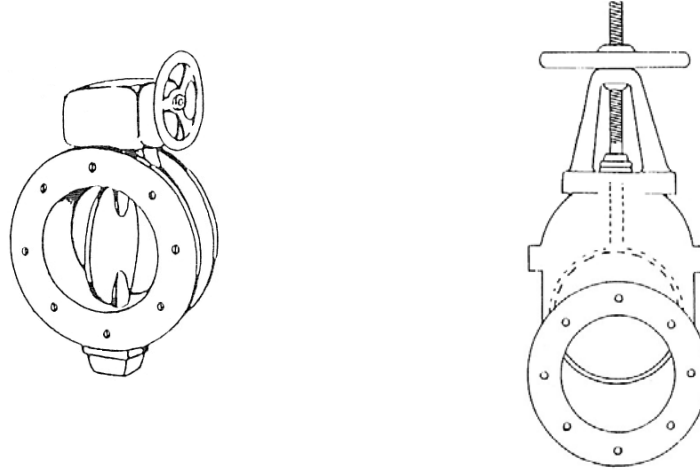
Inlet valve - Butterfly valve (left) and Gate valve(right)
